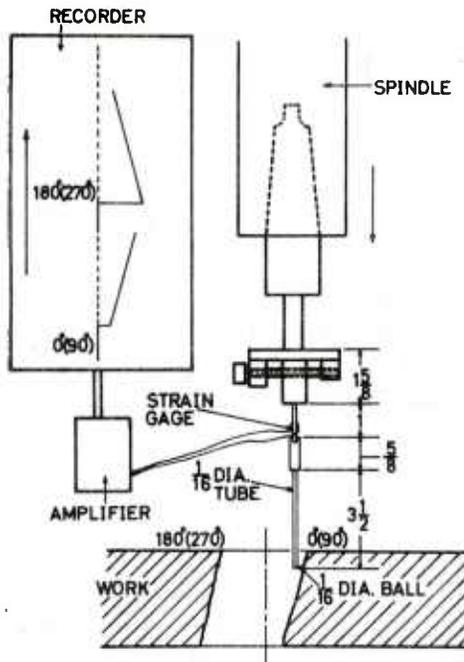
Measurement of Straightness of Drilled Hole (Schematic)
